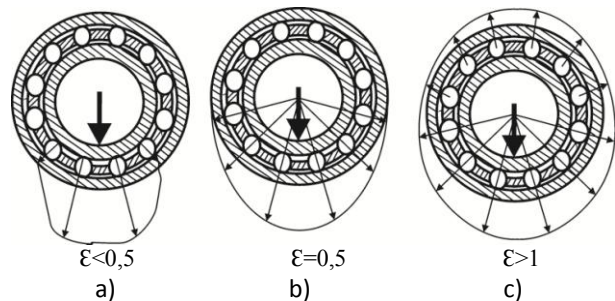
Load distribution to rolling bodies of the bearing mounted with clearance (a), zero clearance (b) and positive clearense (c)
